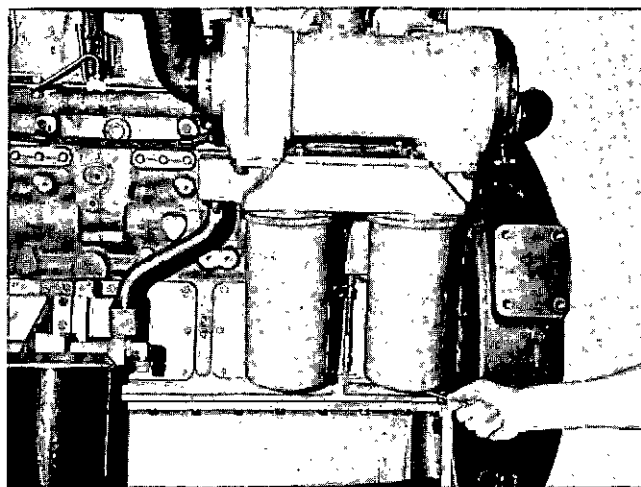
, V414183. Full-flow filter/cooler for non-piston cooled engines
